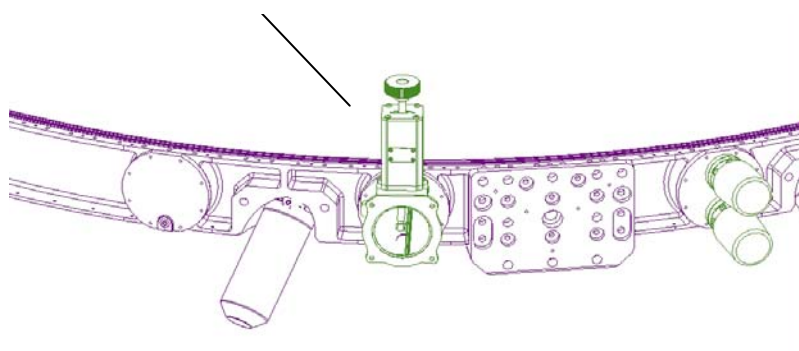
Lower Support Ring Magnet H/W (4 of 6)
